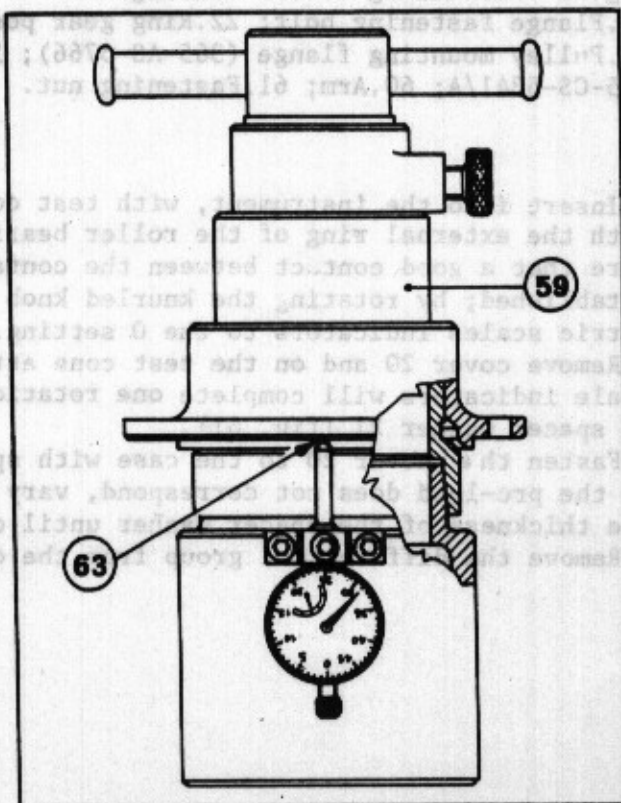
Determining Thickness 21 using tool 365-CS-5341 a/b.
